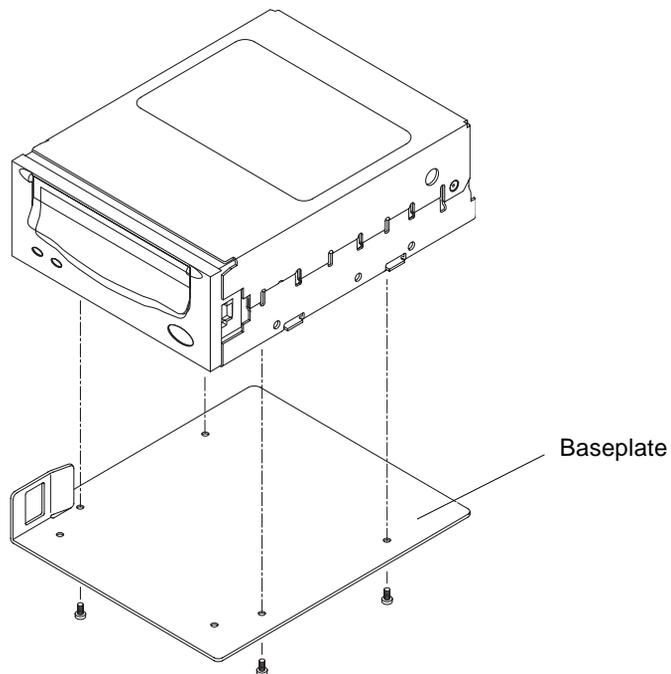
Attaching the Baseplate to the Tape Drive
